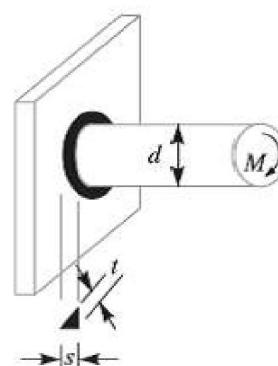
Circular fillet weld subjected to Bending moment.
